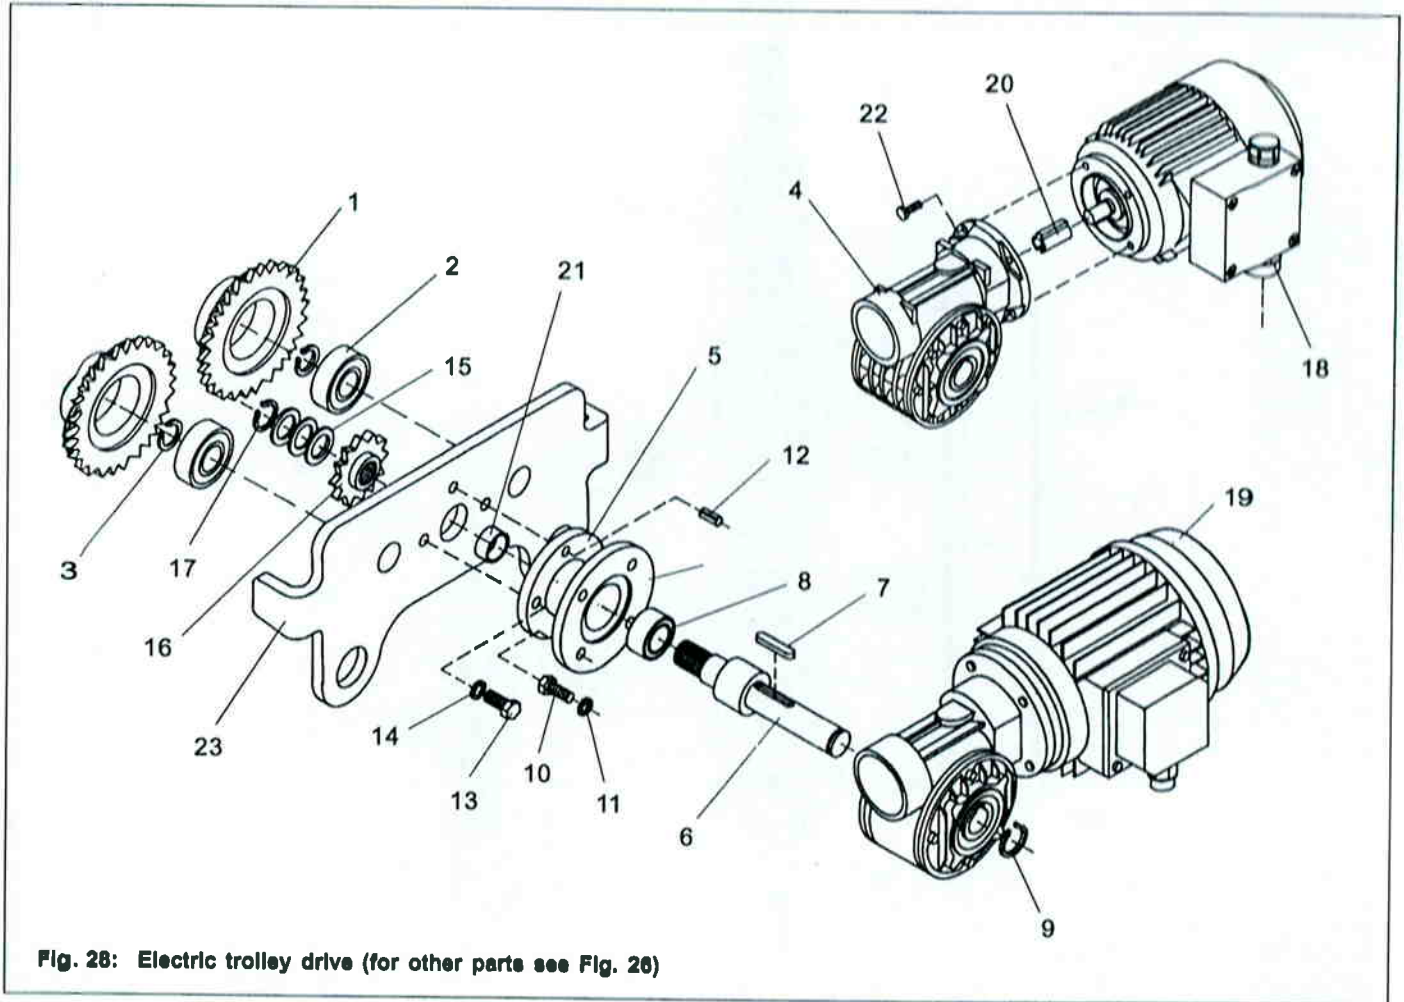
Electric trolley drive (for other parts see Fig. 26)
